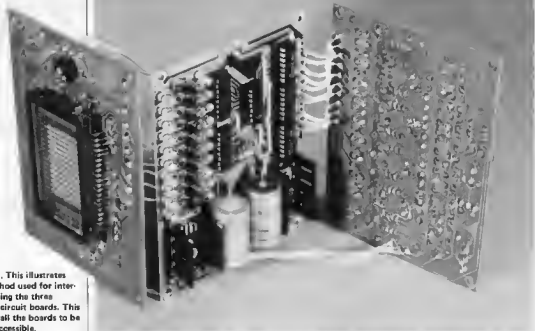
This illustrates the method used for interconnecting the three printed circuit boards. This enables all the boards to be freely accessible.
